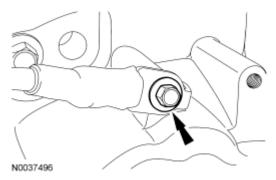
Locating Ground Wire Bolt Courtesy of FORD MOTOR CO.
